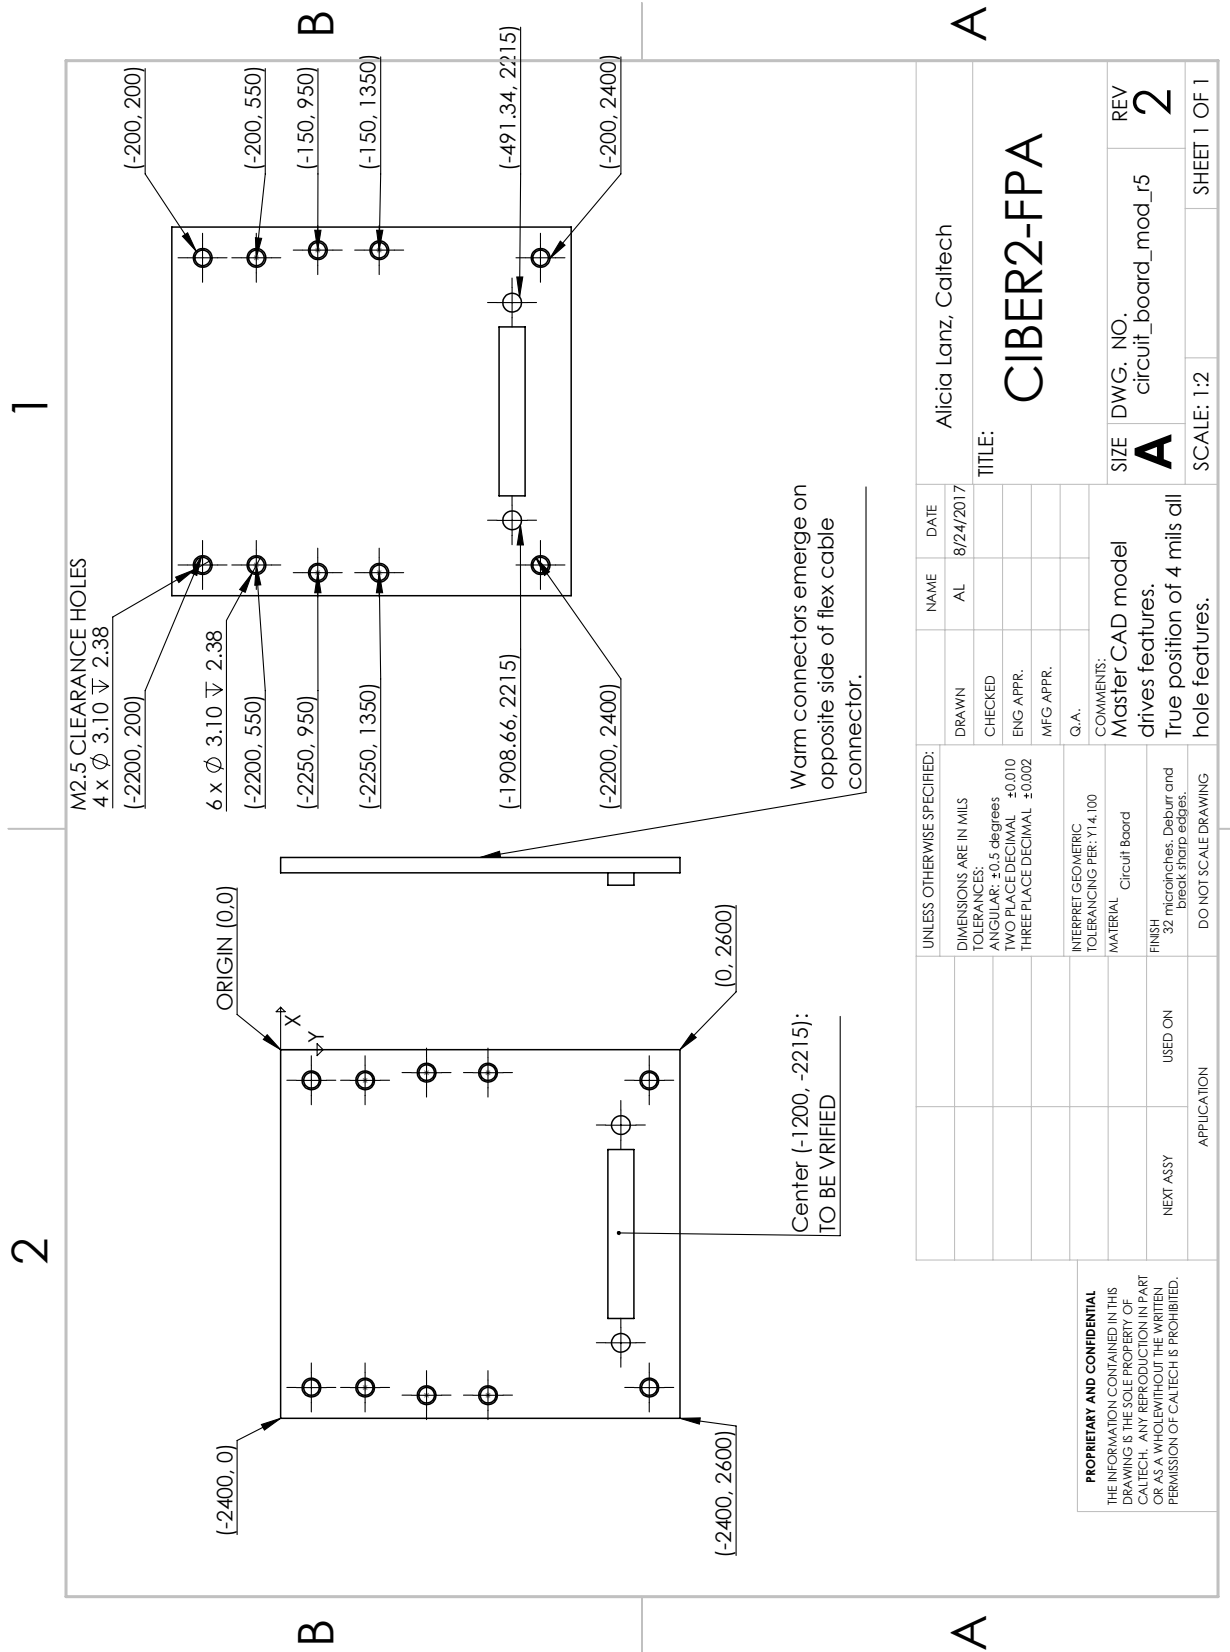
Mechanical drawing for flight version of the CIBER-2 focal plane assembly detector readout circuit board (nominal configuration).
